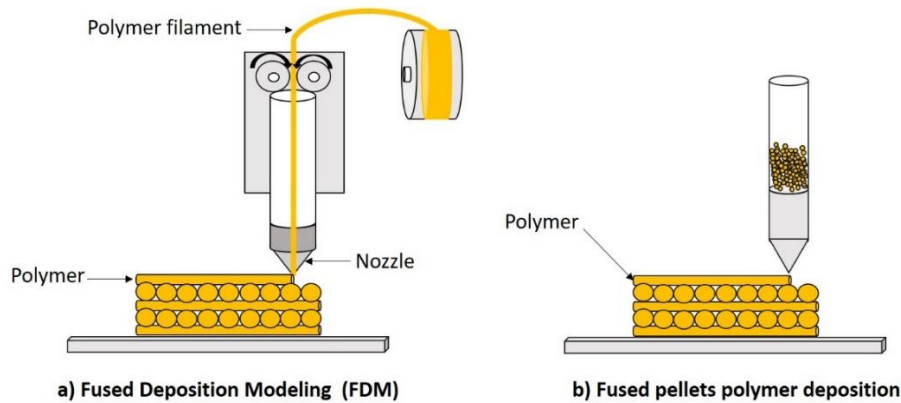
Illustration of material extrusion 3D printing techniques: a) Fused Deposition Modelling (FDM), b) Fused pellets polymer deposition.
